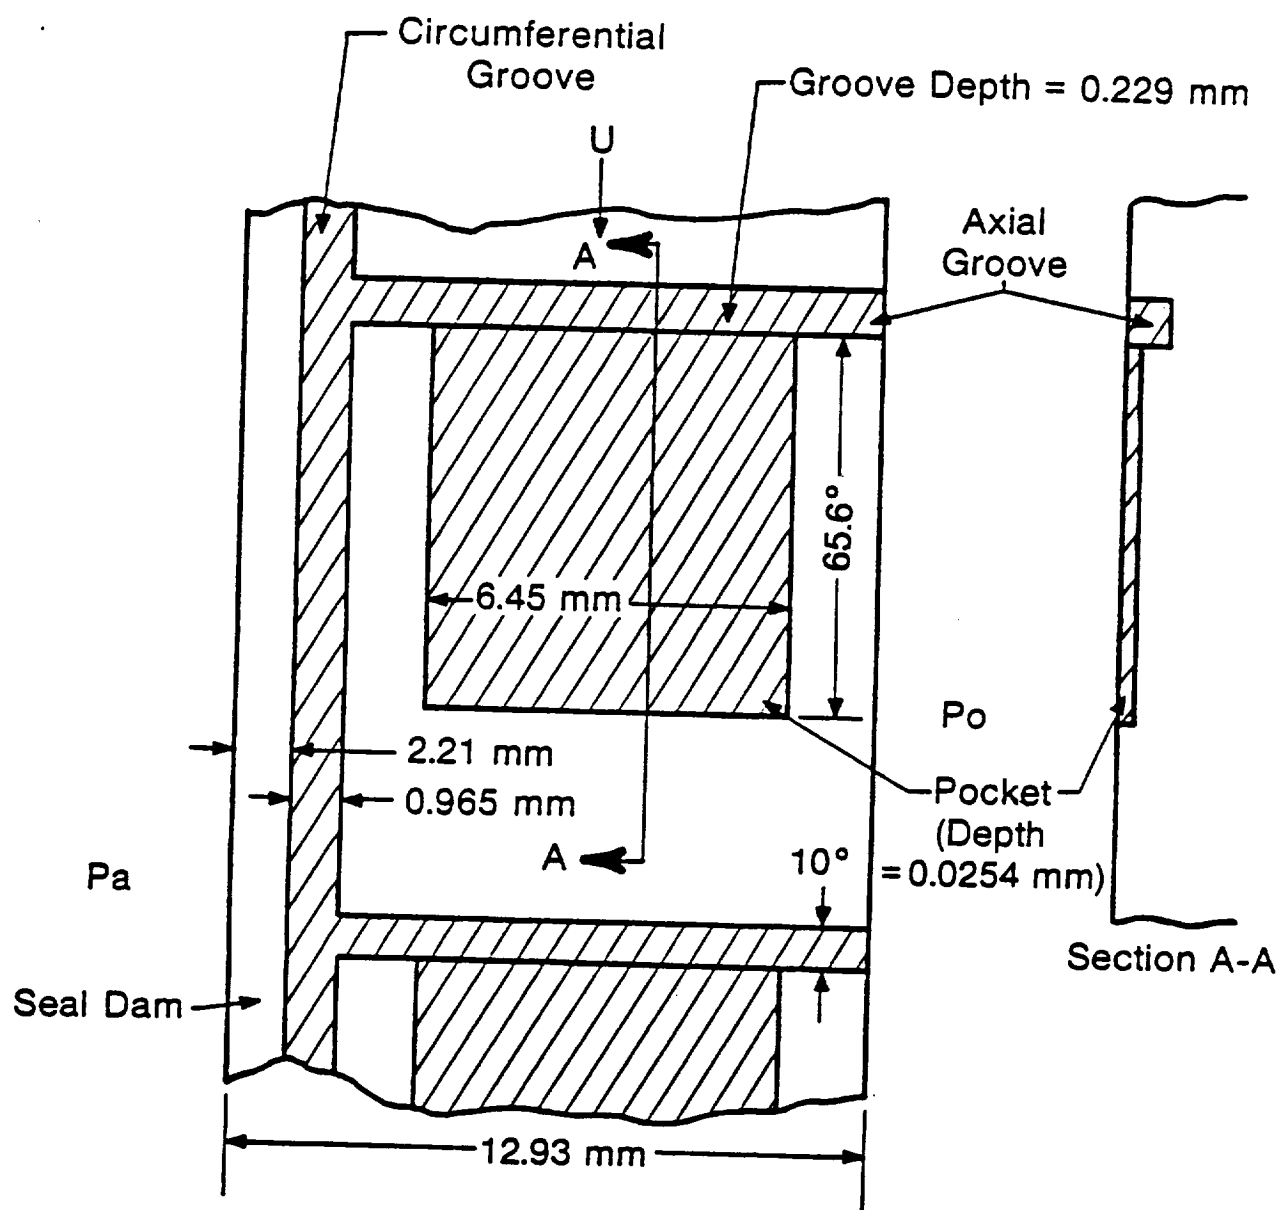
Developed View of 50-mm Rayleigh-Step Pad
